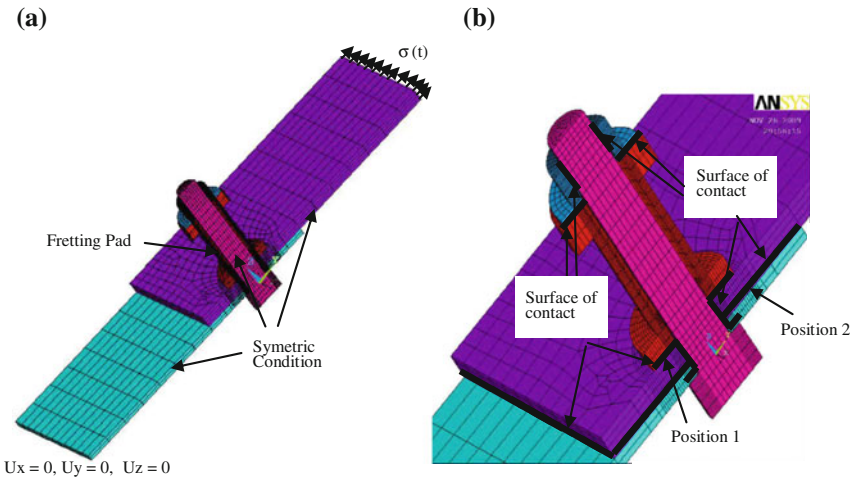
a Geometrical and finite-element mesh of assembly, b modeling of contact surface (damaged surface: position 1 and position 2)
